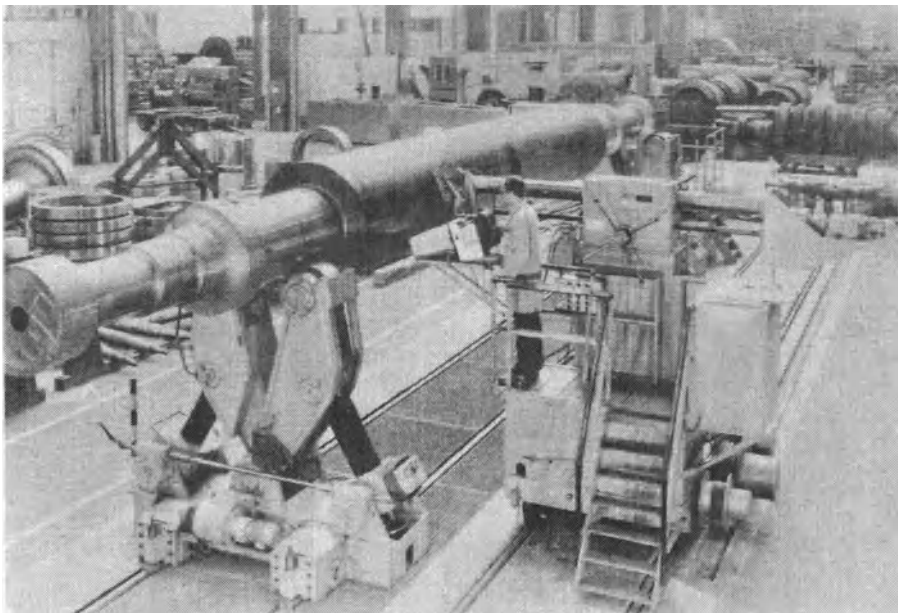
Test installation for rotating forgings up to 150 t weight (courtesy BBC, Baden, Switzerland)
